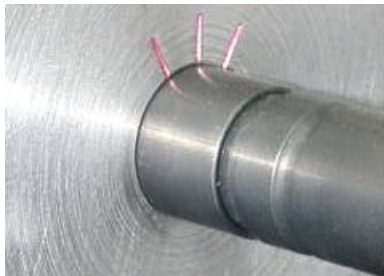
Close-up of the injector cradle showing the orientation marks use to position the injectors for measurement.
